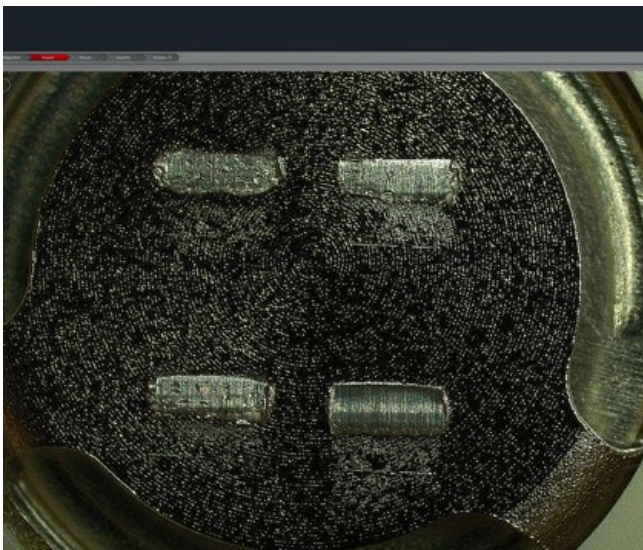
Acceptable Smart Weld Shear Nuggets
